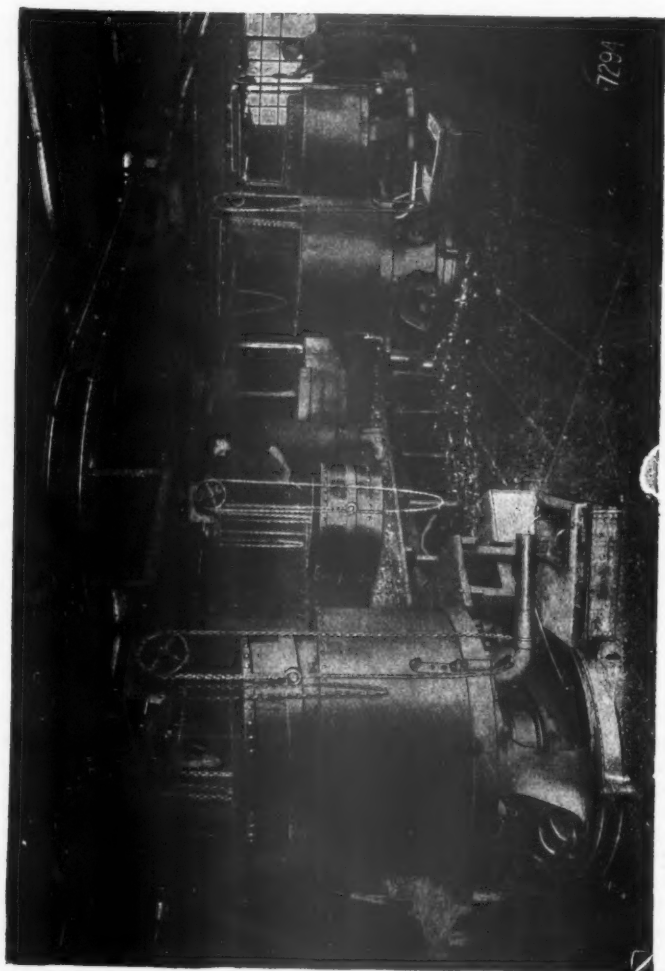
Three centrifugal separators in use. Basket of middle separator removed to loading platform. Note oil outlet at base of separators.
